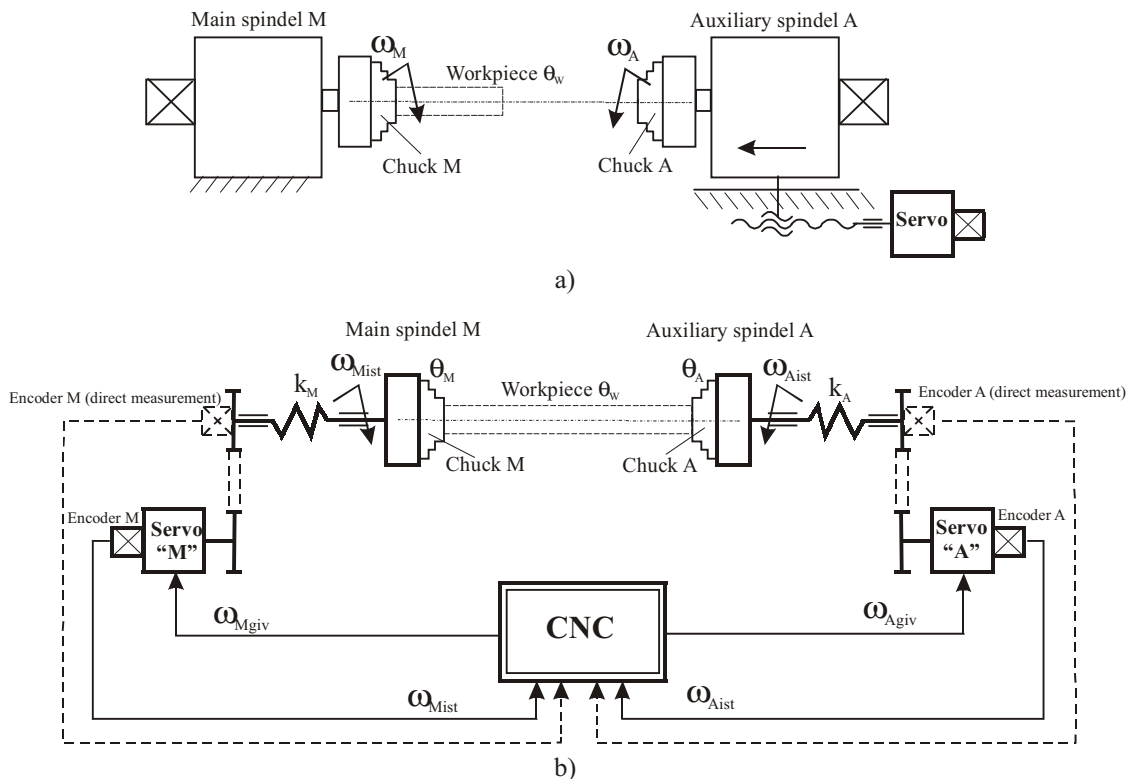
Concept of automatic workpiece reclamping using two spindles (a) and the kinematic scheme of the synchronization while reclamping the workpiece on the CNC lathe (b)
